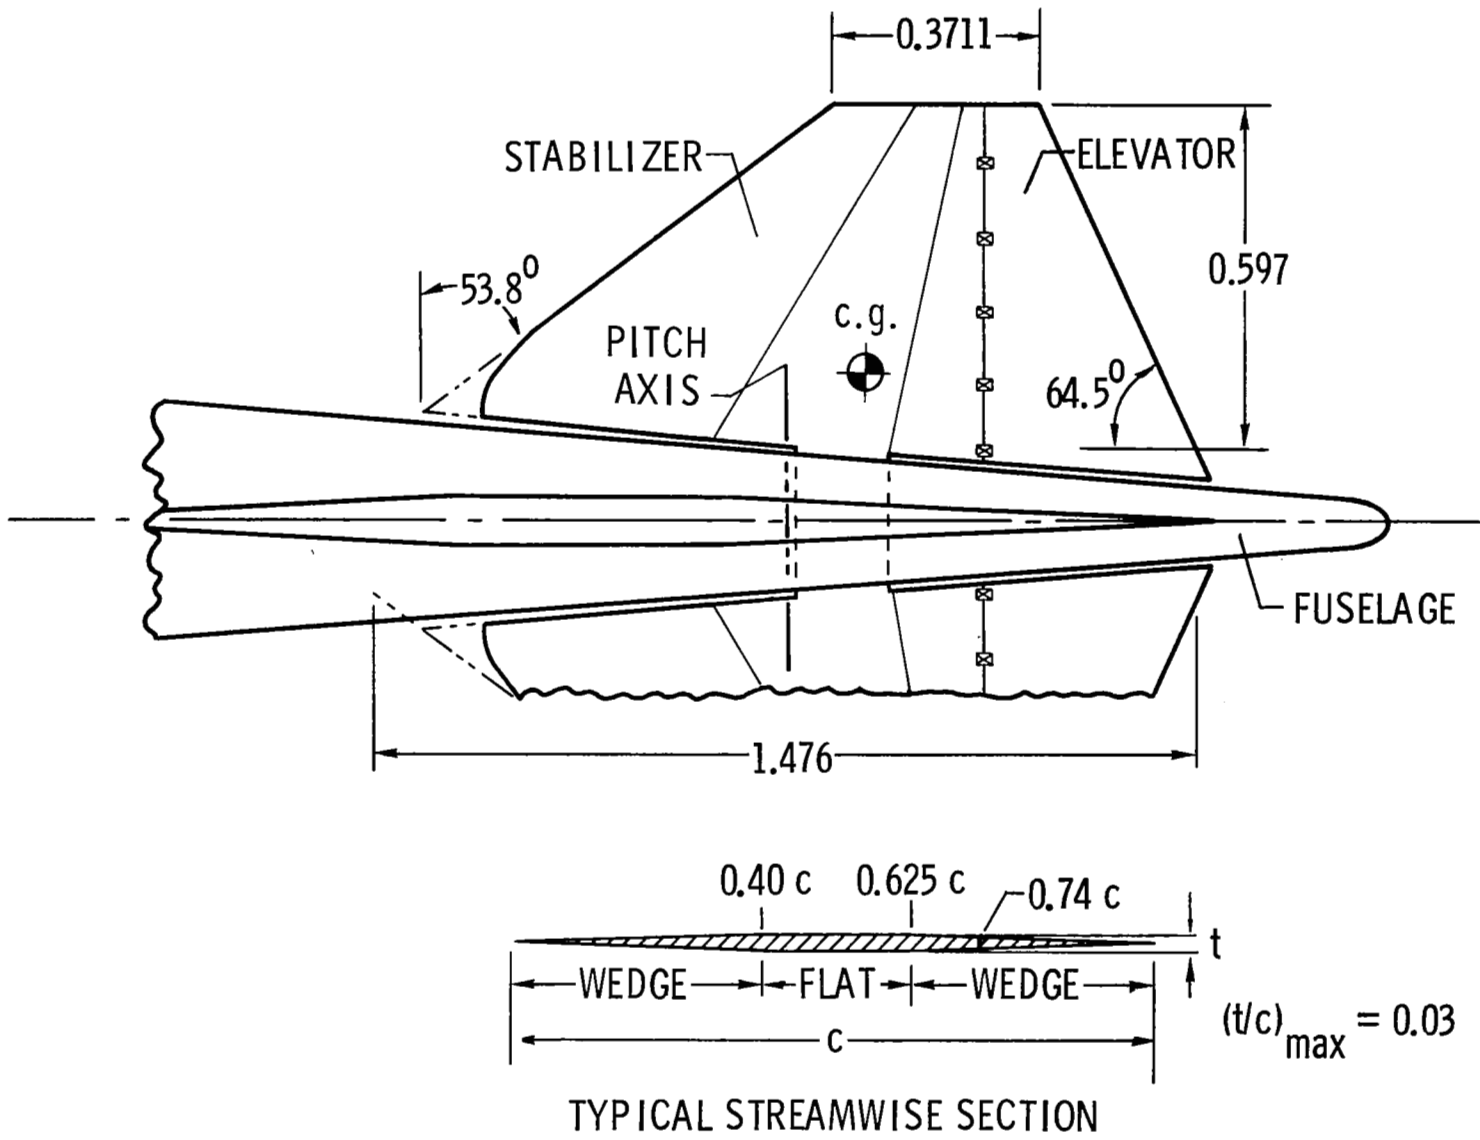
Sketch of horizontal-tail model. Linear dimensions are in meters.
